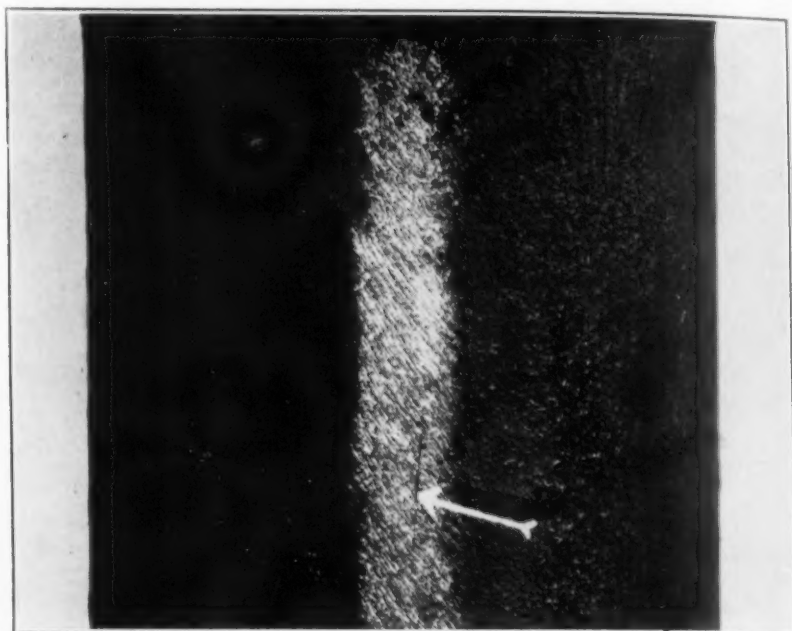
Photomicrograph of Oil and Water Pump Drive Gear Showing Surface Seams. Specimen Coarse Etched. $\times 2\frac{1}{2}$.
